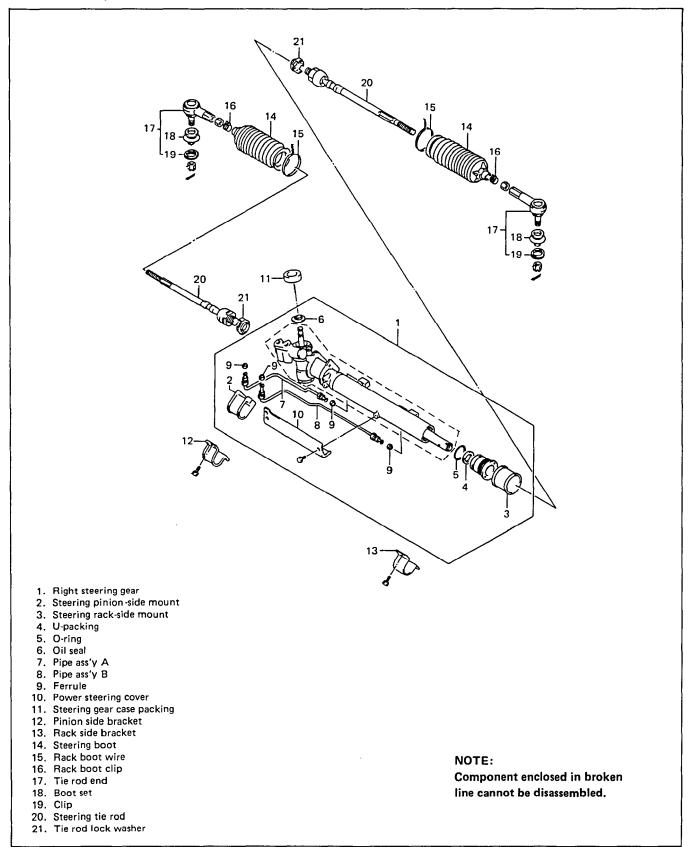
B1-34 Exploded View of Power Steering Gear Box
